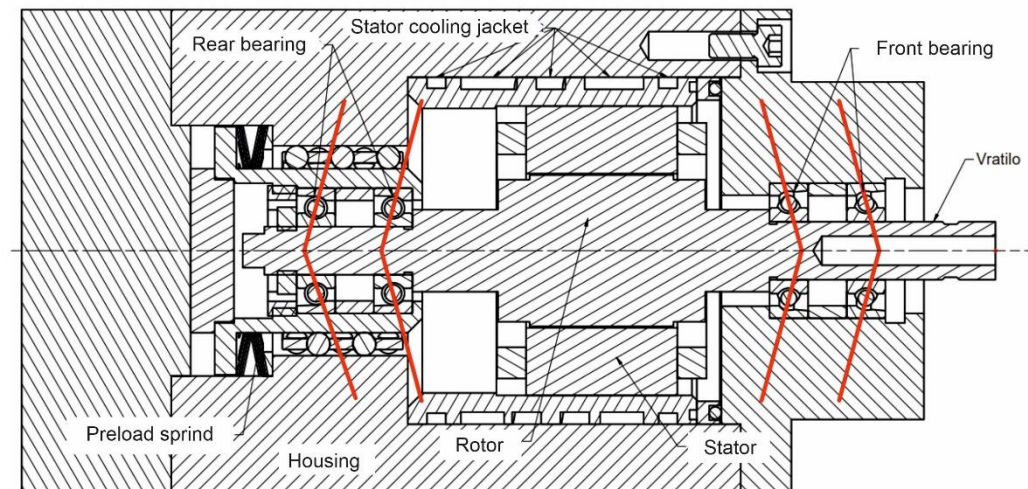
Cross section of GMN TSSV 90000 high-speed motorized spindle assembly
